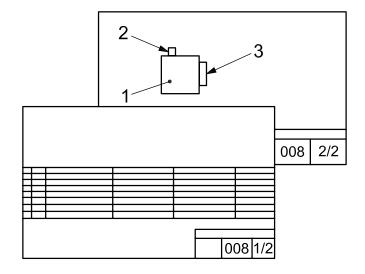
Parts list and assembly drawing as one document, but different sheets
